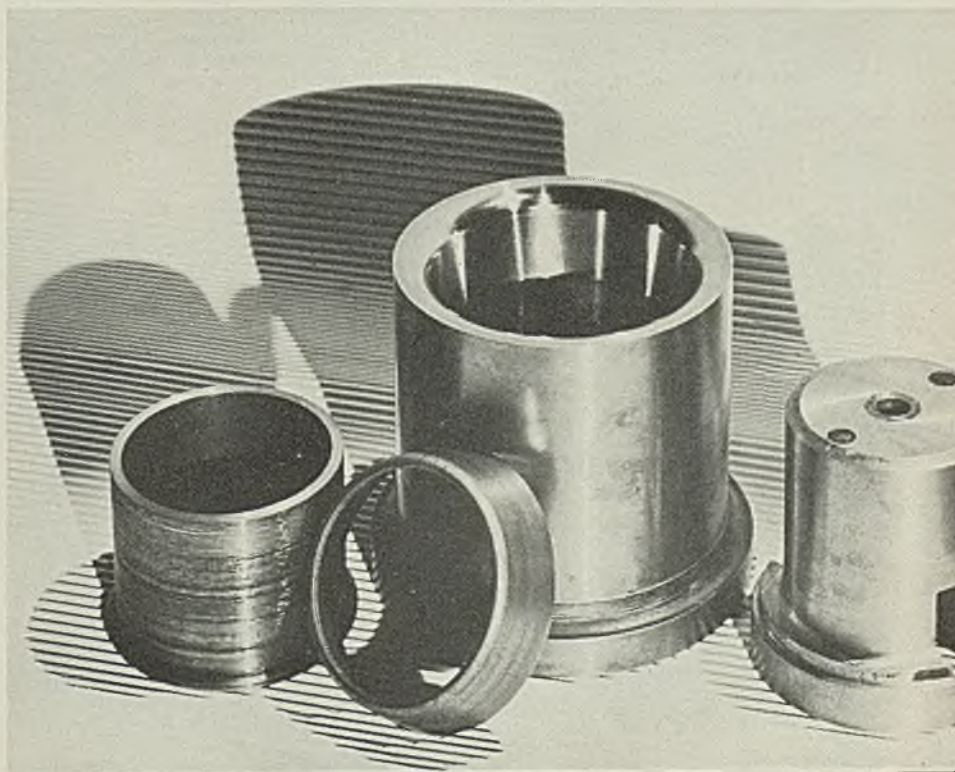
Made of graphitic steel containing silicon, this die is used for blanking and forming roller bearing cages from hot rolled strip
